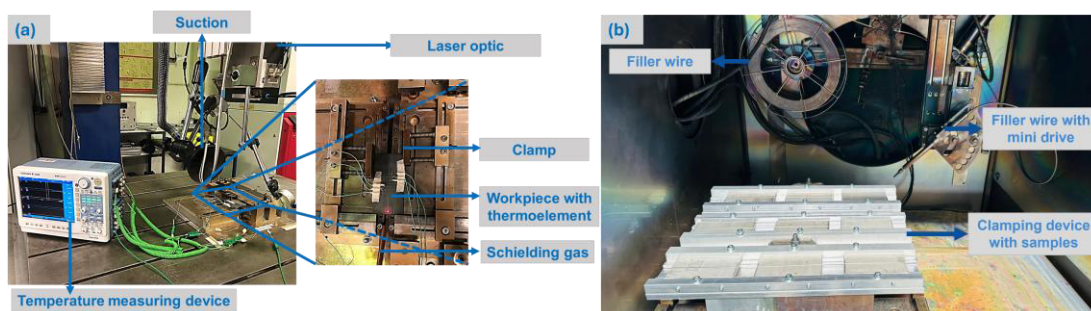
(a) Laser beam welding setup, (b) electron beam welding setup with filler wire set up at the Welding and Joining Institute (ISF)
